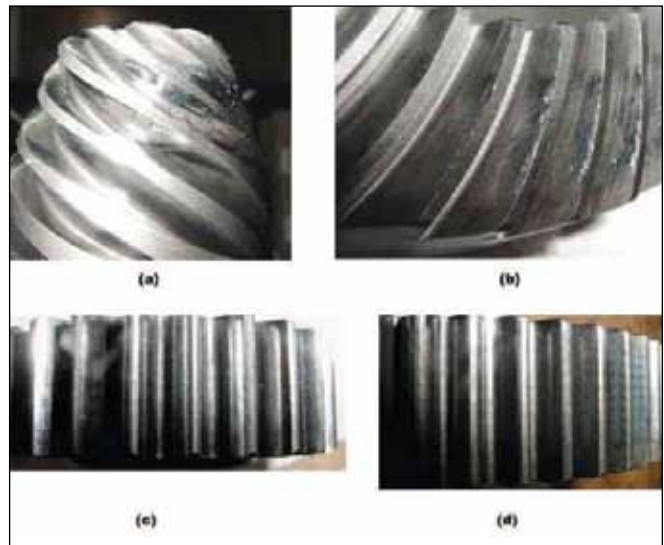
Hyponic gear components after 14.5 million cycles: a) hypoid pinion; b) hypoid gear; c) spur gear pinion; d) spur gear (Ref. 2).
